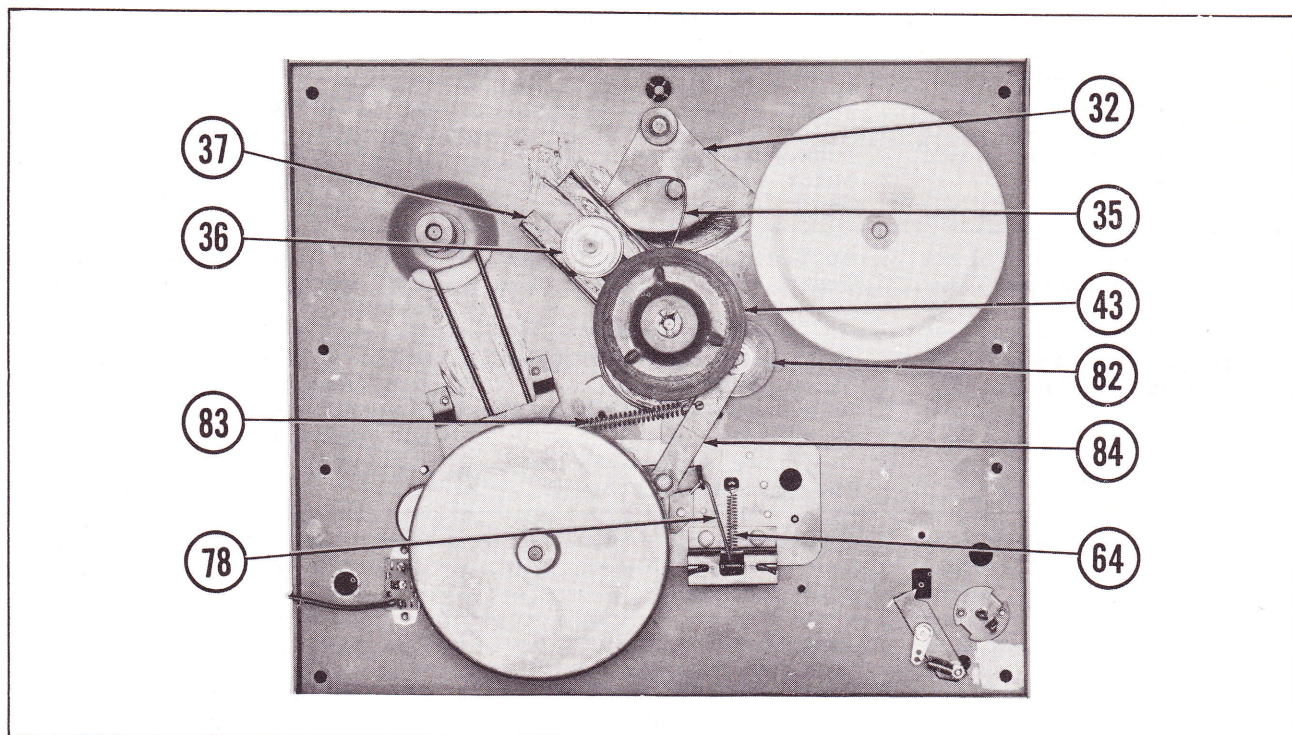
BOTTOM VIEW OF MECHANISM WITH DRIVE MOTOR PLATE REMOVED
